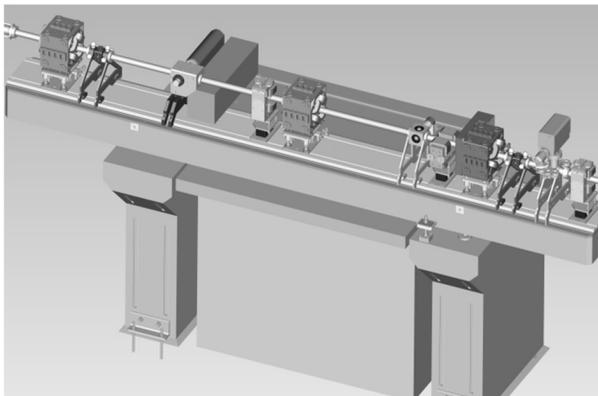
Bunch compressor girder setup with support columns, racks, and rack shielding.
